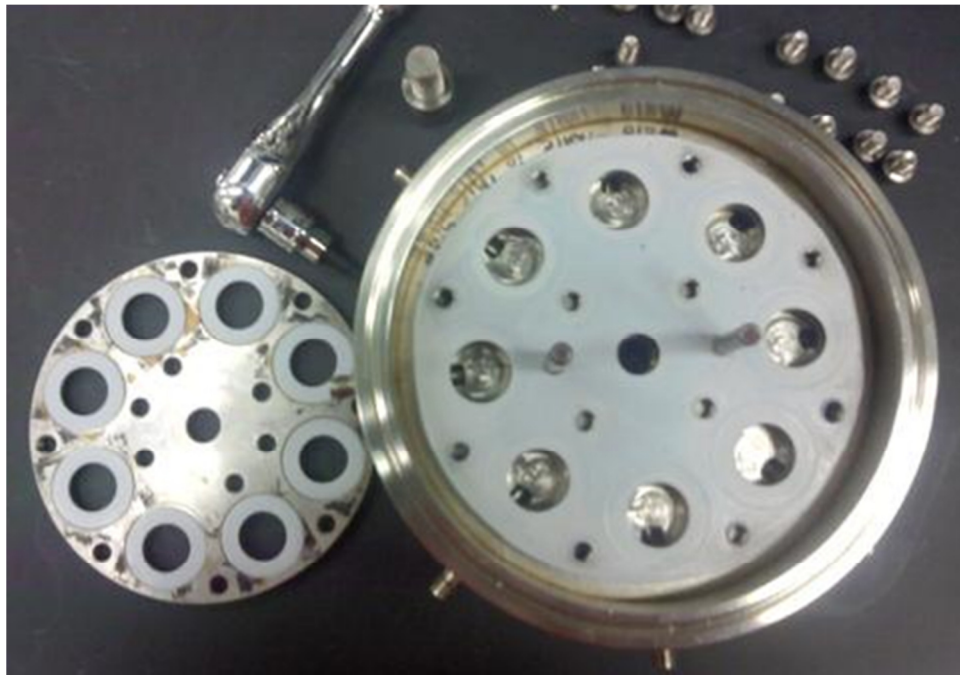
Eight station pressurized blister fixture unassembled. Membrane is placed over each hole and mechanically clamped with the top plate
